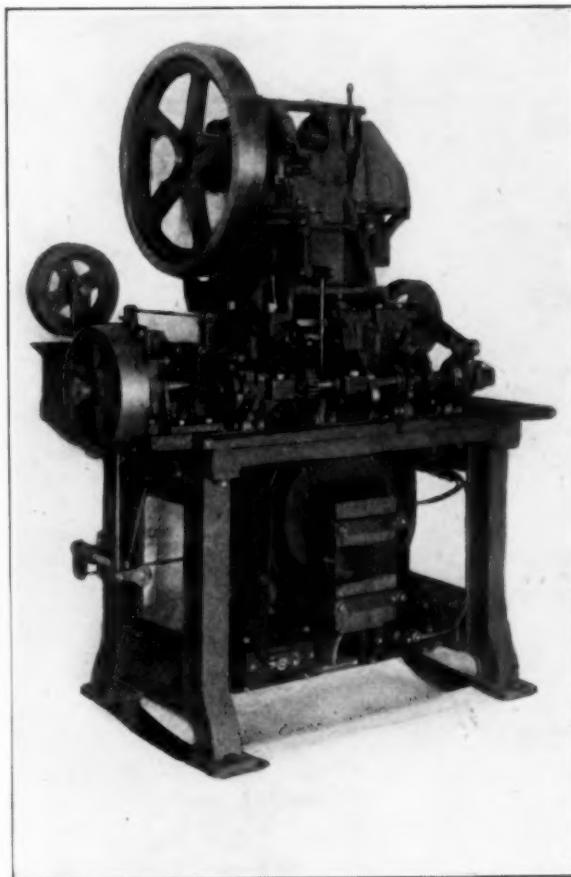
REAR VIEW OF ELECTRIC CHAIN WELDER
